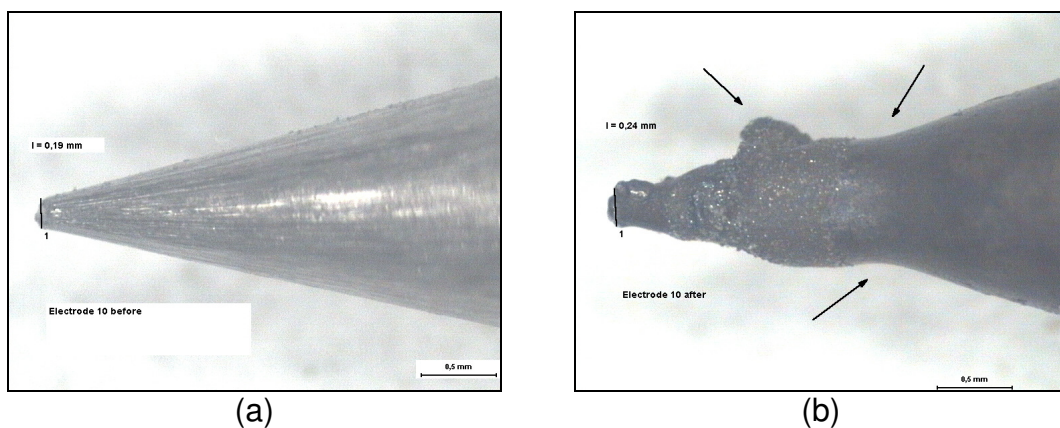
Angle of Electrode 10 used for experiment number 10: (a) before welding $\leq 35.44^\circ$; (b) after welding $\leq 39.41^\circ$.
